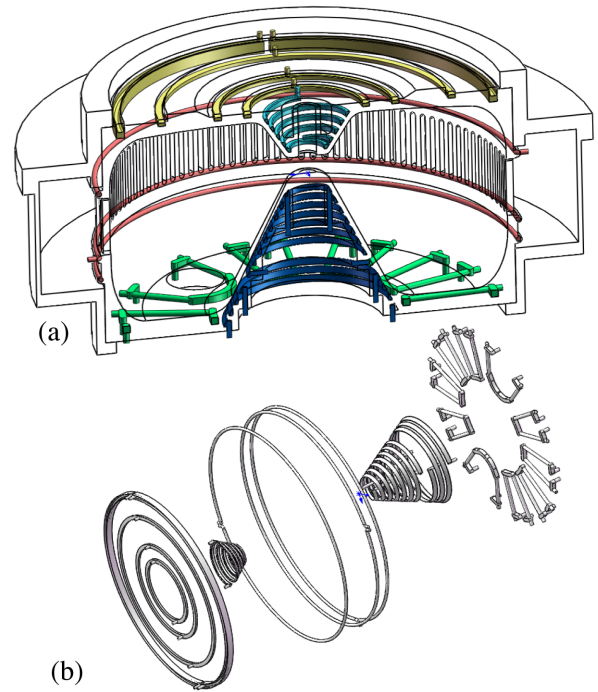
(a) Water cooling channels in the gun marked by different colors. (b) Explosion view of 23 cooling channels.
